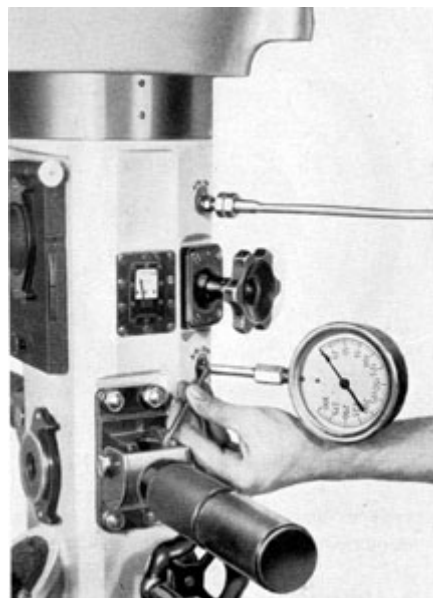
Opening the air outlet valve with an offset screwdriver.
